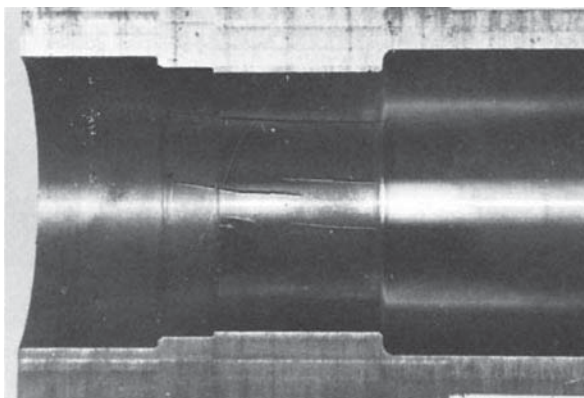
MAGNETIC RUBBER INDICATIONS OF SURFACE CRACKS IN AIRCRAFT FASTENER HOLES (PRODUCED BY YOKE MAGNETIZATION DC CONTINUOUS)
